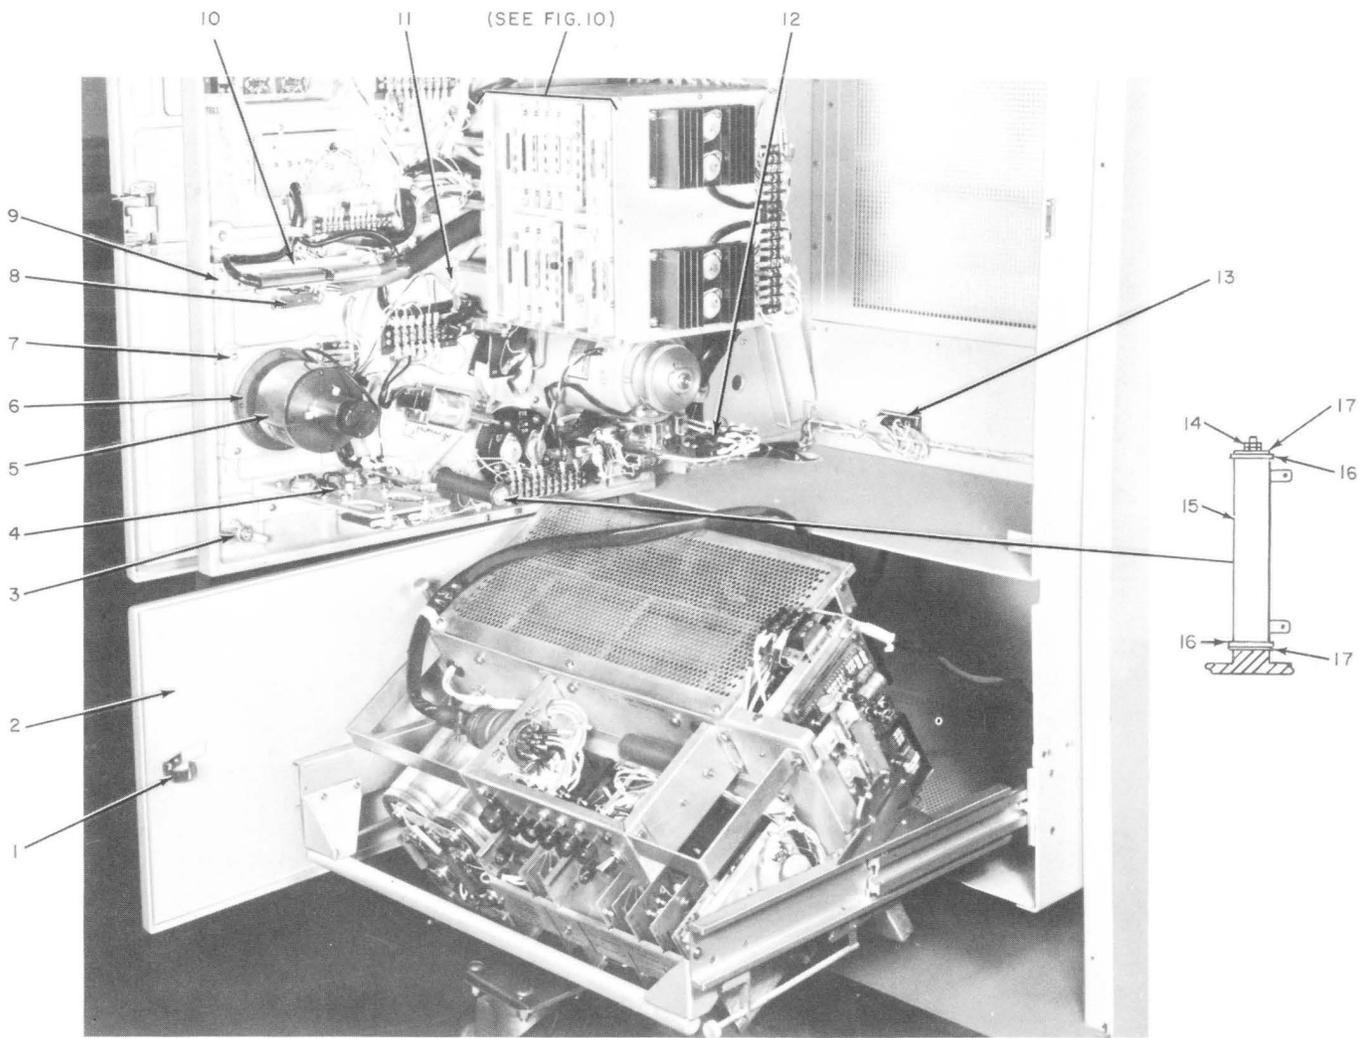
Partial Rear View of Tape Transport Lower Part (KS-21104 Converter Shown Installed)
